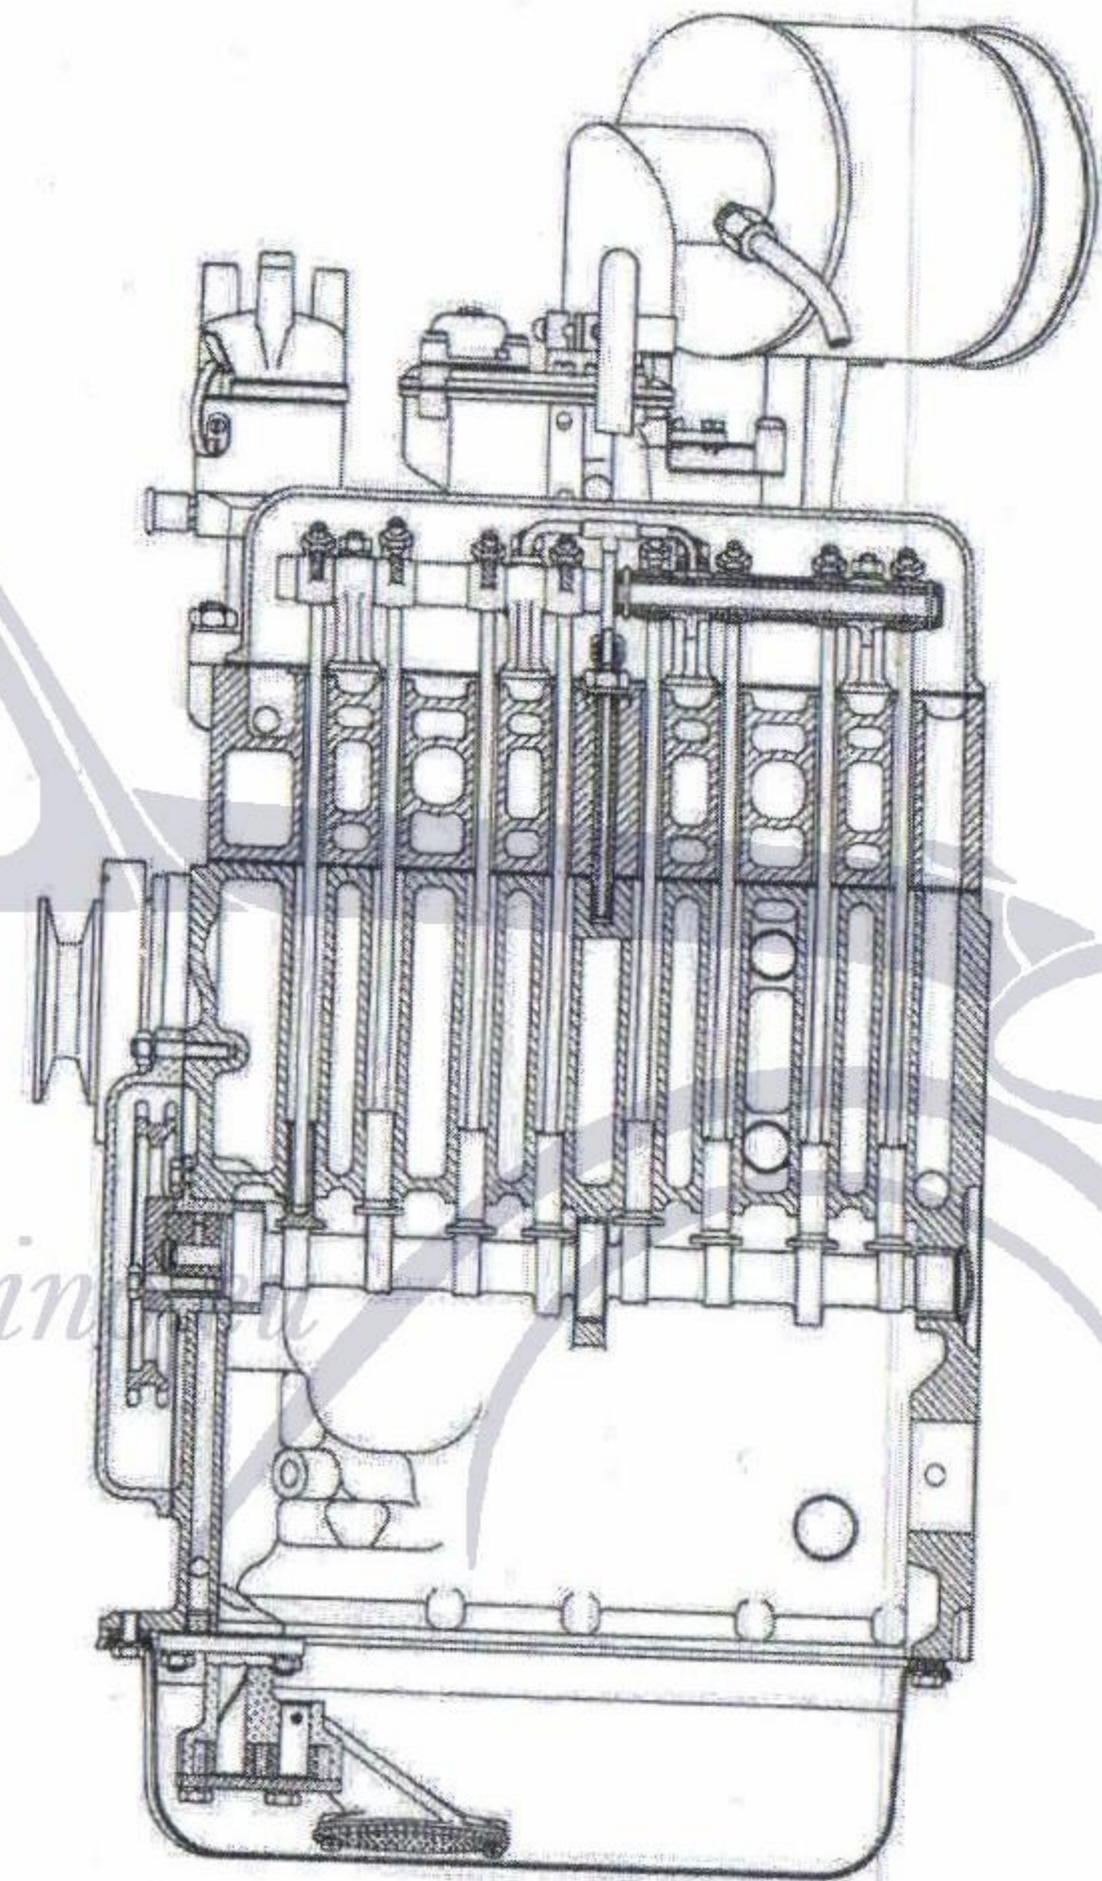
Side cross section on camshaft of engine Mod. «500 B».
